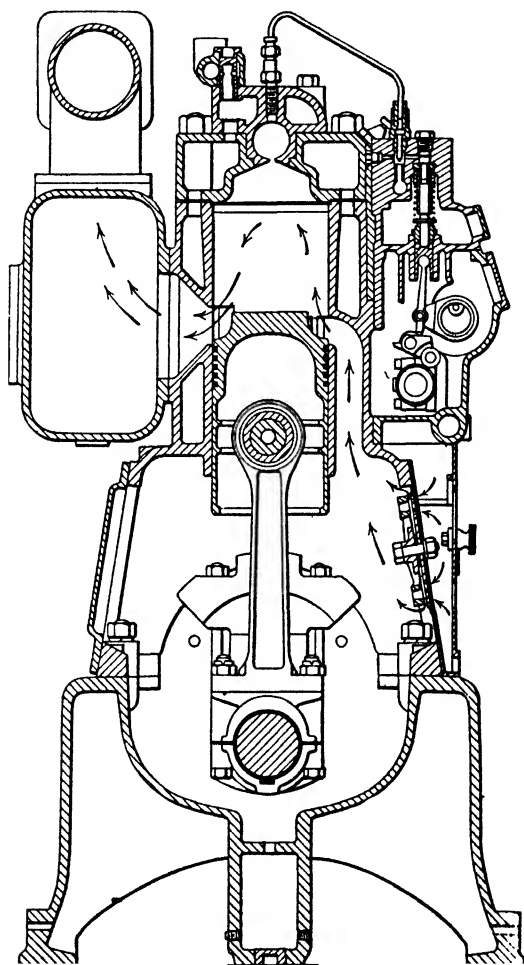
CROSS SECTION OF CRANKCASE-SCAVENGED TWO-STROKE ENGINE.
